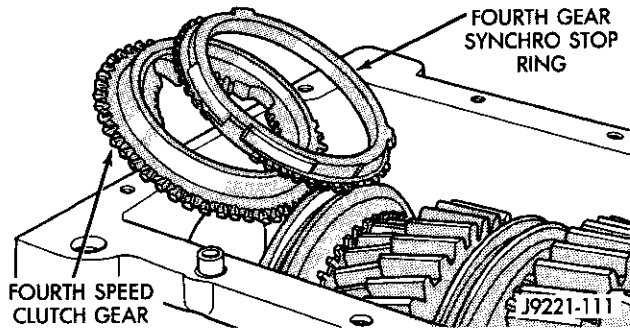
Fourth Gear Clutch Gear Stop Ring Removal
